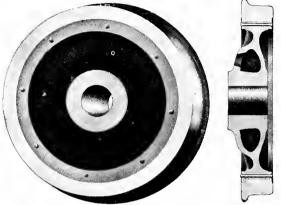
Cast Iron Plate Center with Tire Held by Shrinkage, Double Lip Retaining Rings and Rivets.
